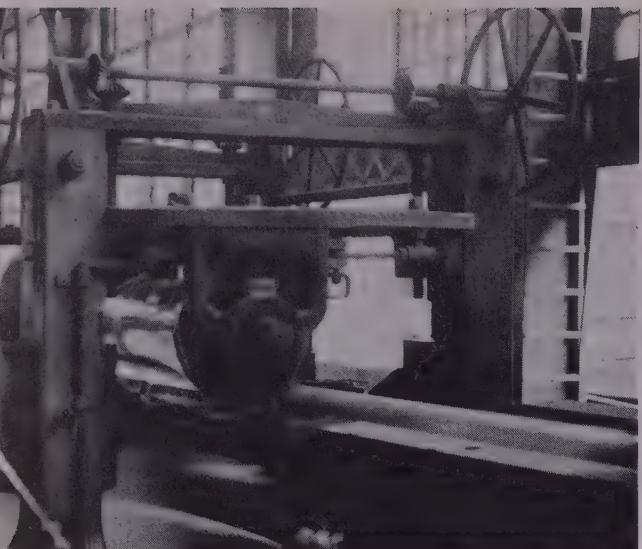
Cross rolls which straighten lap welded pipe and give it a truly cylindrical shape
